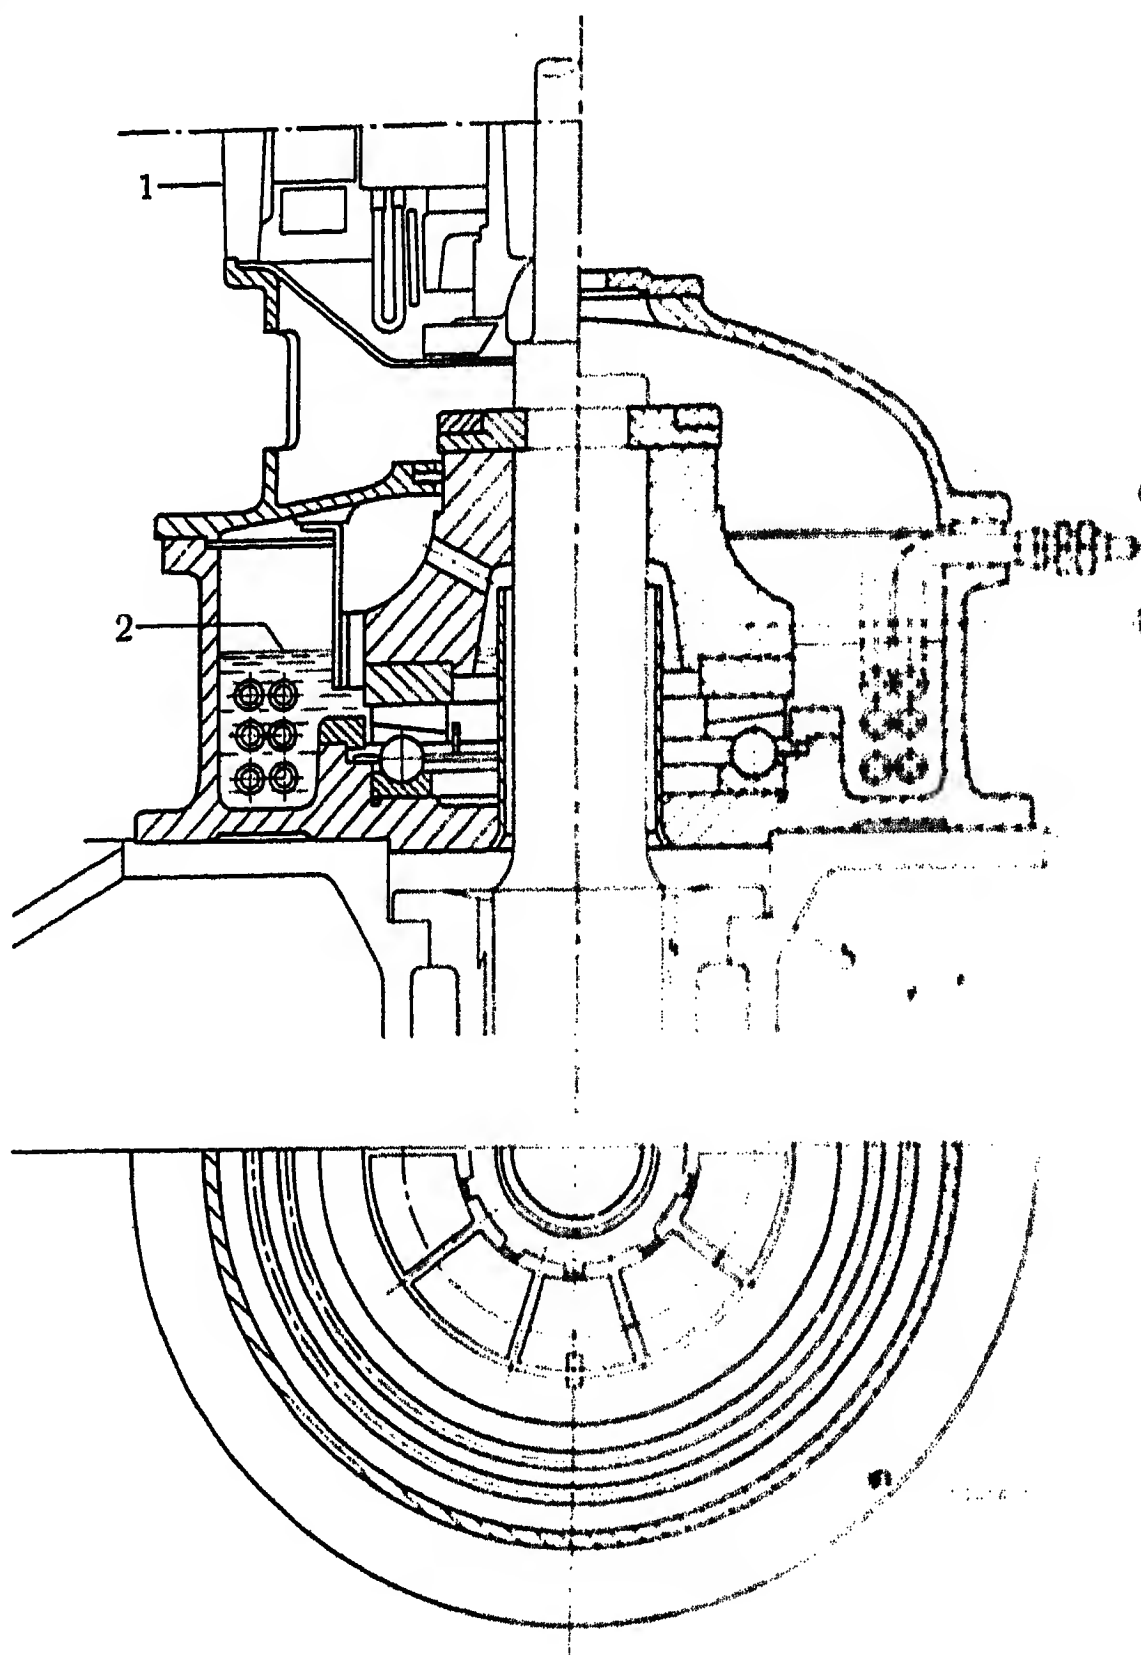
Segmental thrust bearing, 350 tons bearing pressure, 100 r. p. m.
